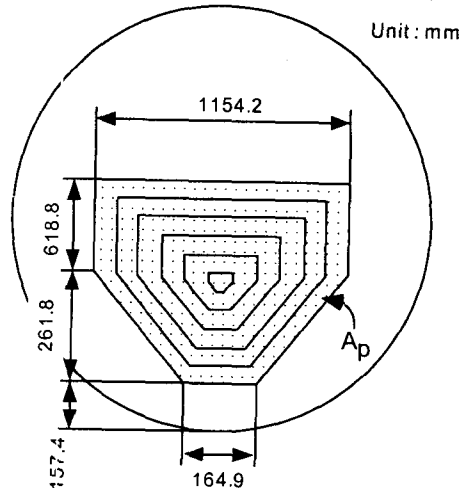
Schematic drawing for perforated region in the tubesheet and its dimension
